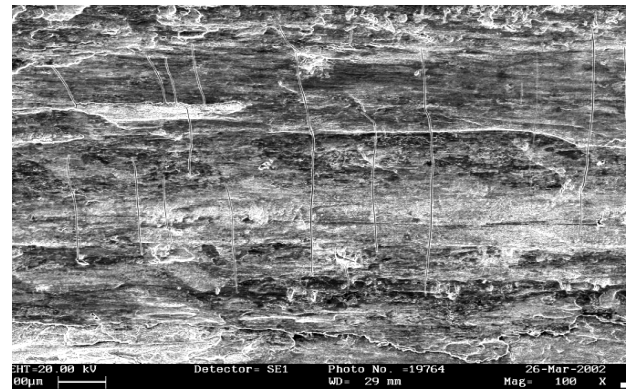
Heavily smeared surface with “grinding cracks” through friction with tool fixture before rework
